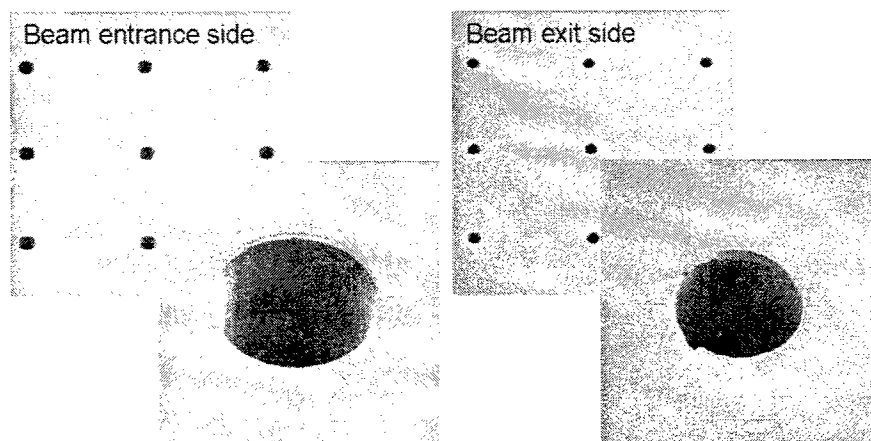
Fused silica, drilled with 157 nm excimer laser radiation rotating mask technique
